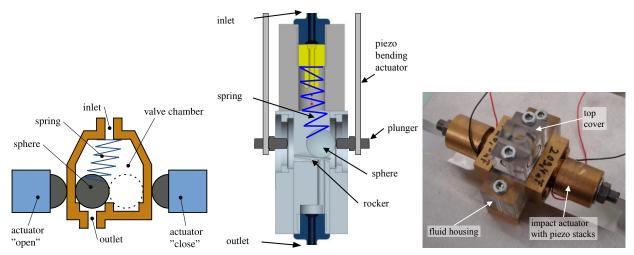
(Left) concept of the impact actuated shift valve, (centre) design with piezo bending transducers, (right) prototype with piezo stack actuators
